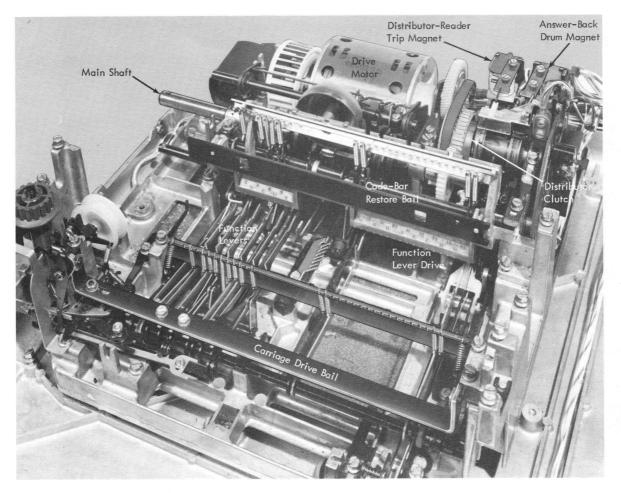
Typing Unit (Selector Mechanism and Codebars Removed)
